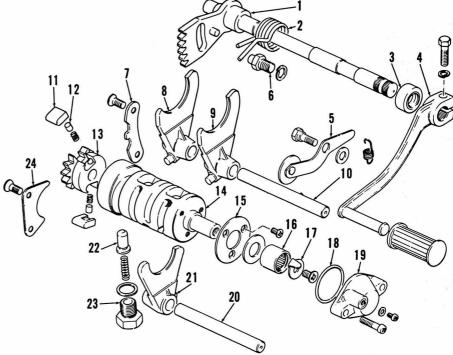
Component parts of shifter assembly used in the TS 250 R models. Shift forks (8 & 9) are interchangeable.
